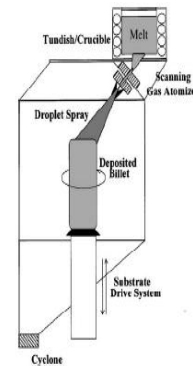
A schematic drawing of the spray casting apparatus used in this study.
